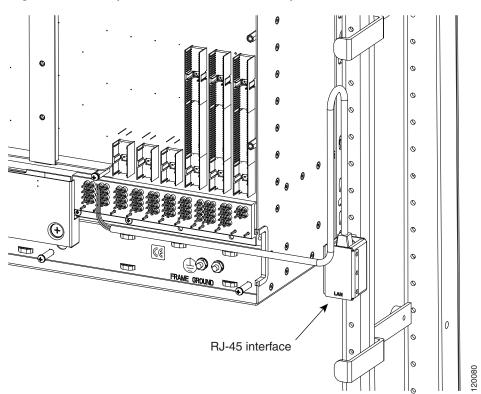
Optional RJ45 Jack-to-Wire-Wrap Cable and Connector Installation
